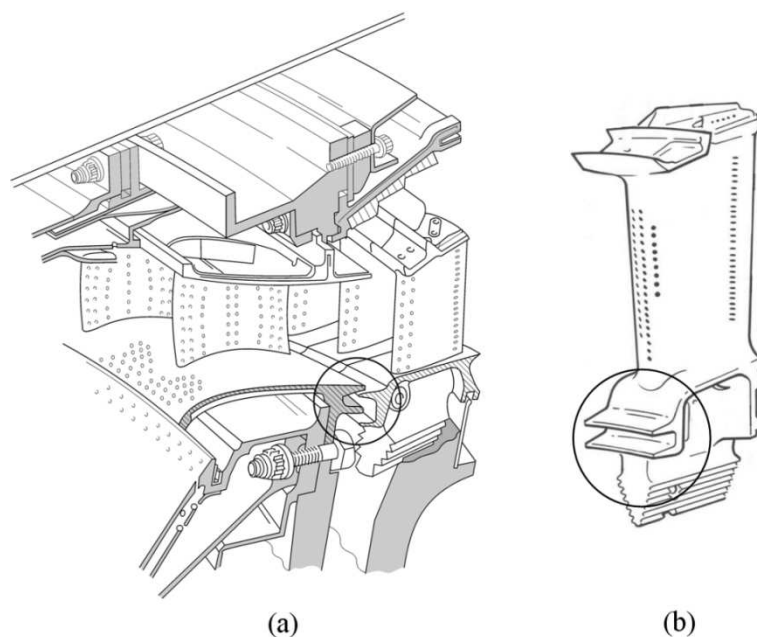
(a) Cooled turbine stage; (b) Double seal on blade
